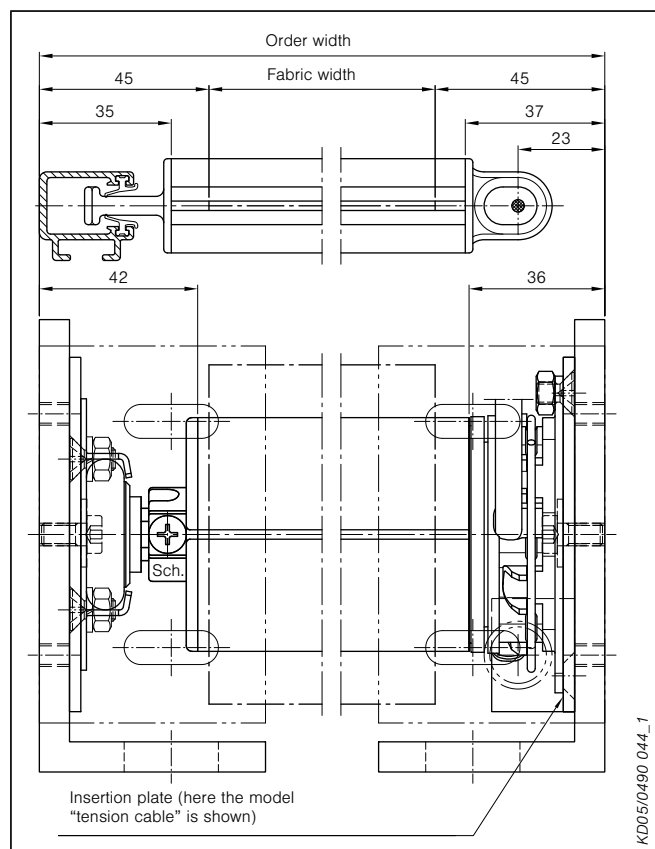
Vertical awning 491 with motor, guide cables or rails, motor end bearing situation
